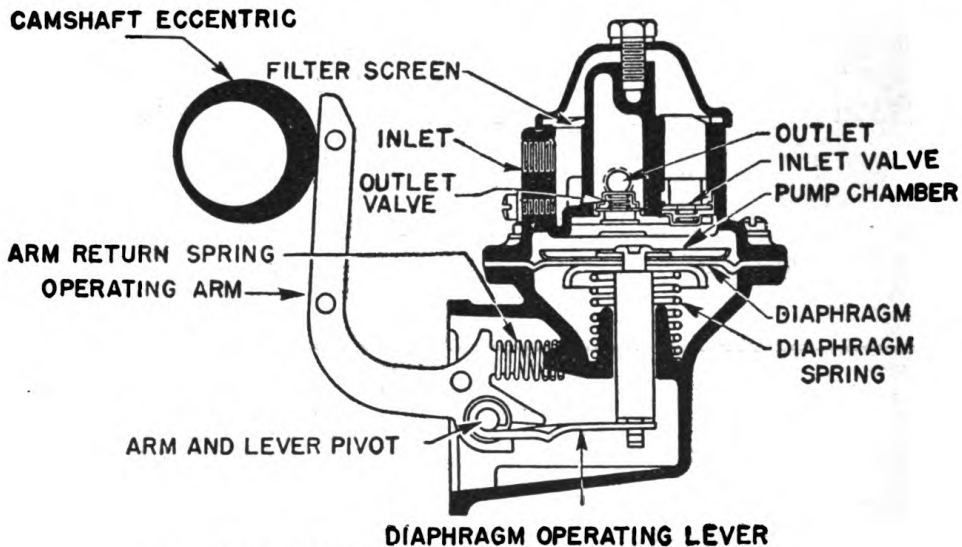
Mechanical fuel pump with built-in fuel filter.
